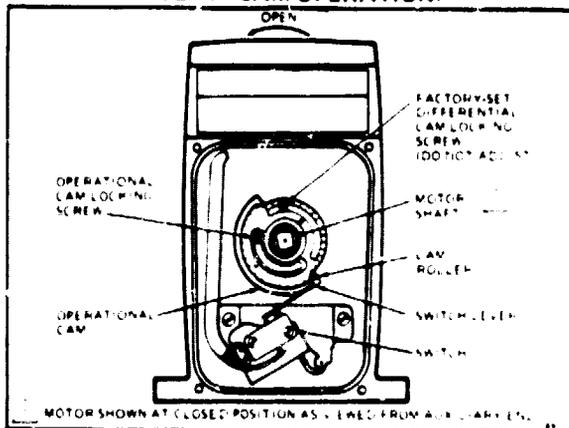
LOCATION OF AUXILIARY SWITCH AND CAM ASSEMBLY IN THE M941C.
